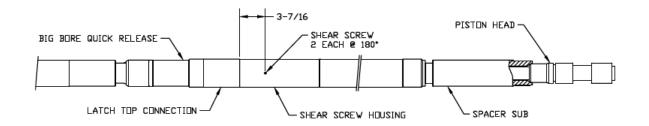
POSITIONING LATCH ROD WITH LATCH DOGS
